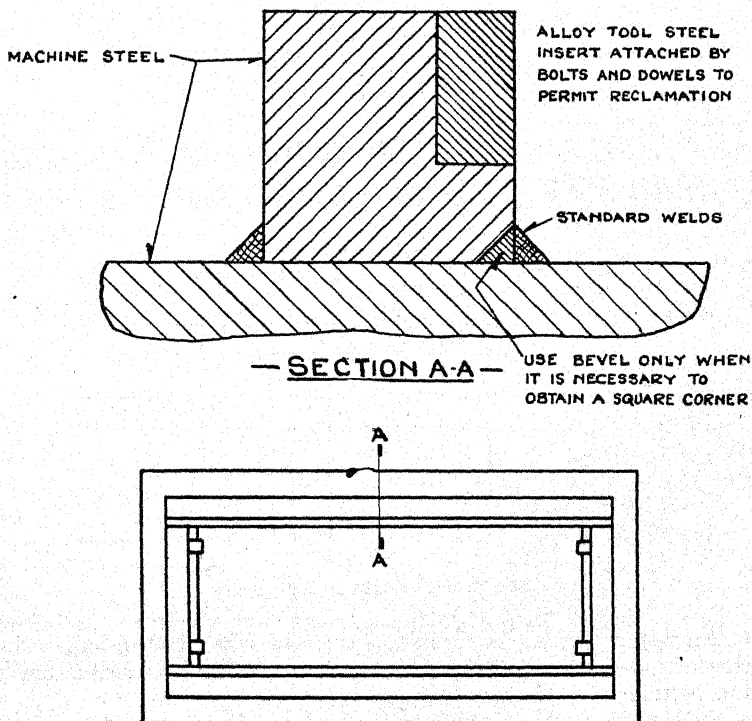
Blanking die utilizing arc welded fabrication.
